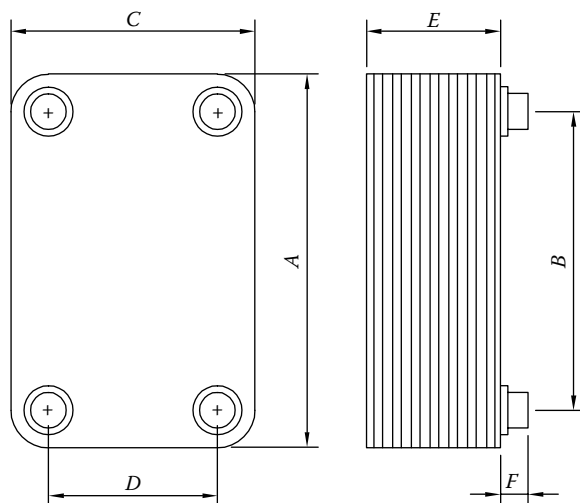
Overall dimensions of brazed plate heat exchanger.
